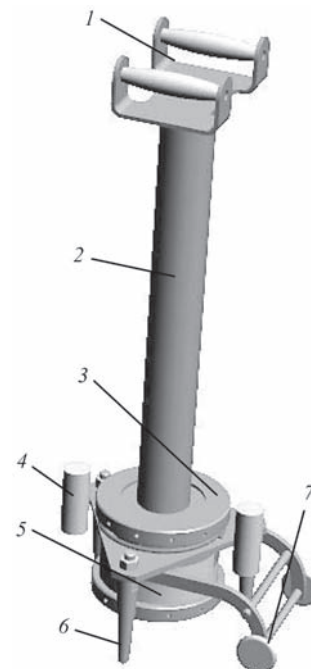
Appearance of manual tool for EDT (1 — fixed handle; 2 — base; 3 — mechanism for ED fastening; 4 — backlight; 5 — ED; 6 — support; 7 — transport trolley)
